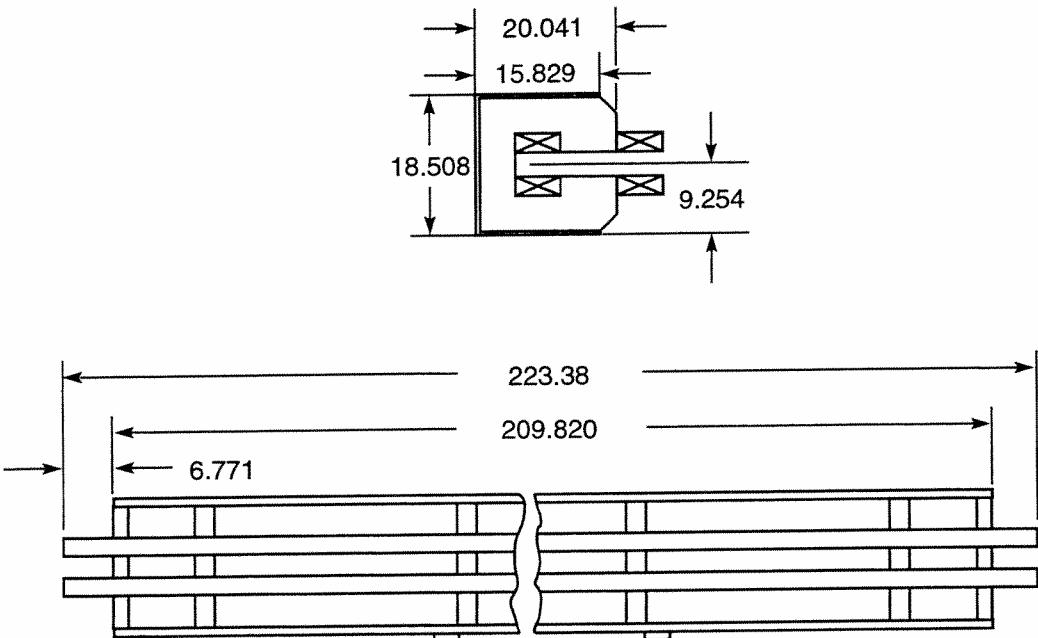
End and side views of the HER bending magnet. Dimensions are given in inches.
